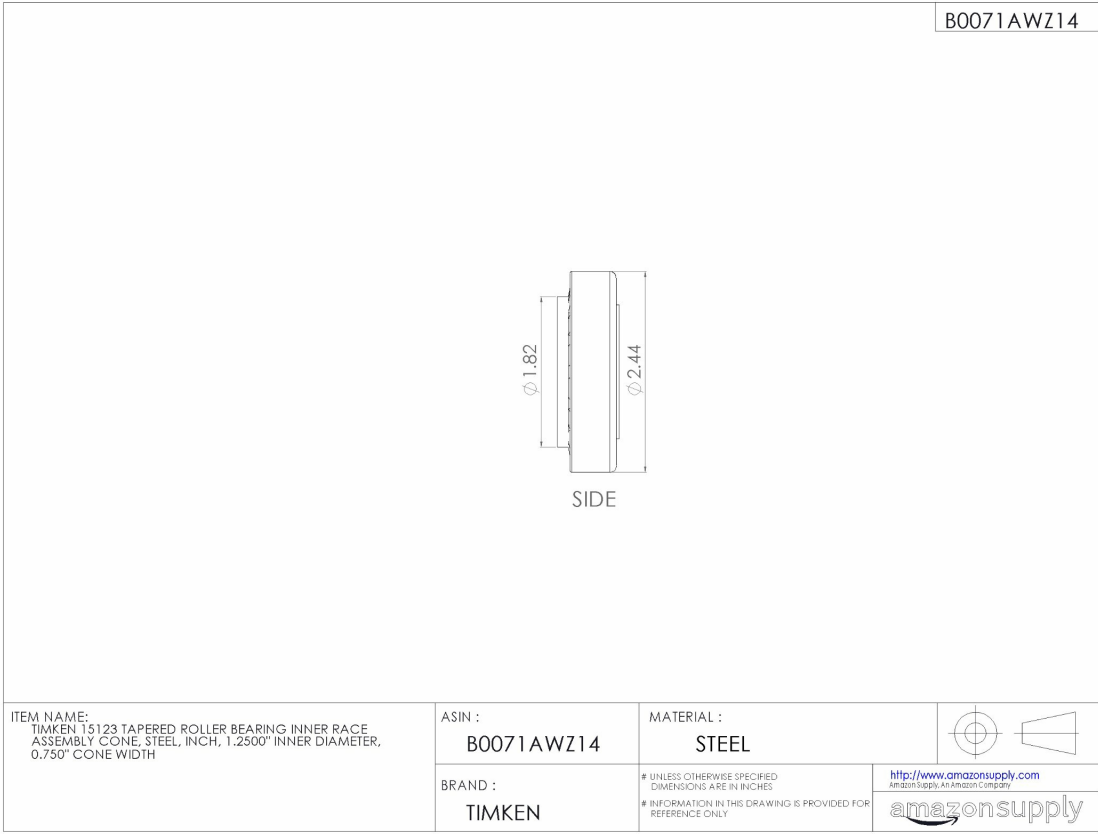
Side view technical drawing of the Timken 15123 bearing. This diagram illustrates the bearing's profile and height, aiding in spatial planning and fitment checks.
